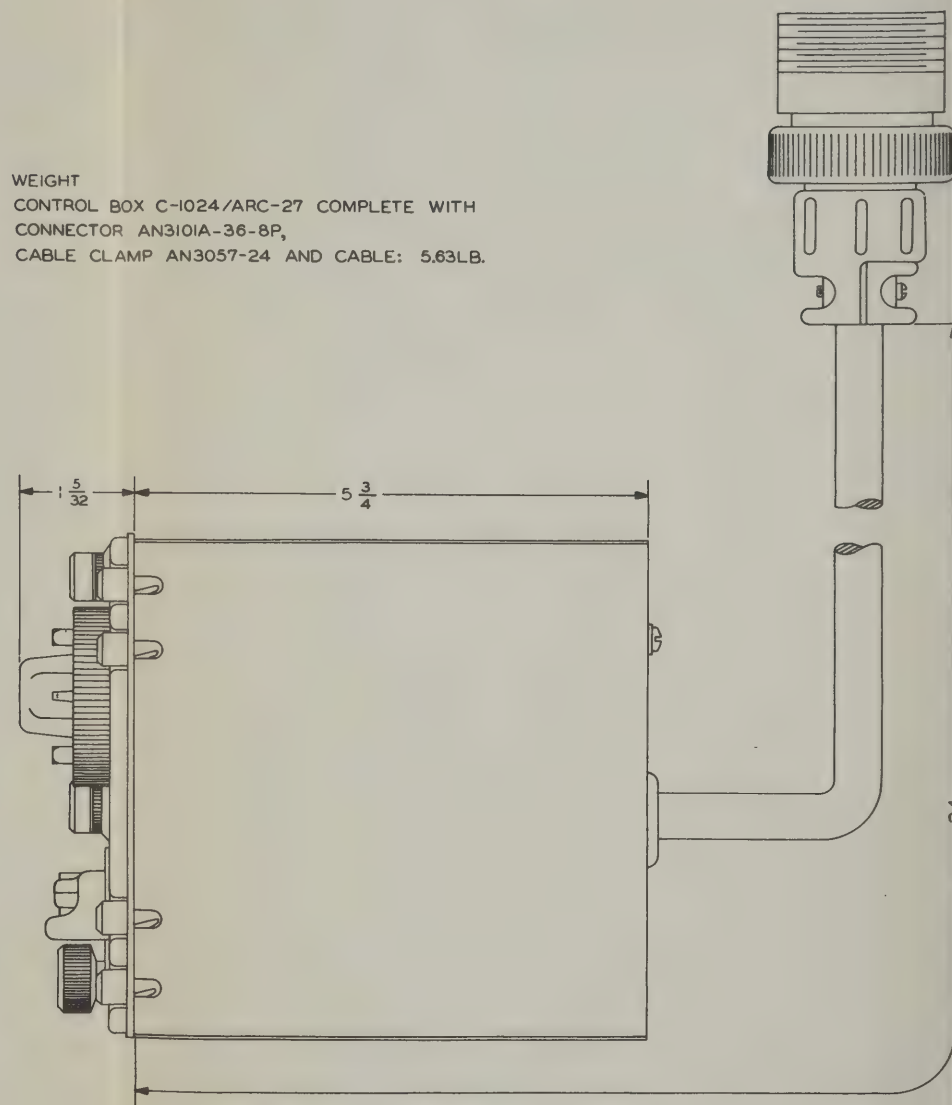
K. Radio Set Control C-1024/ARC-27A, Outline and Mounting Dimensions
